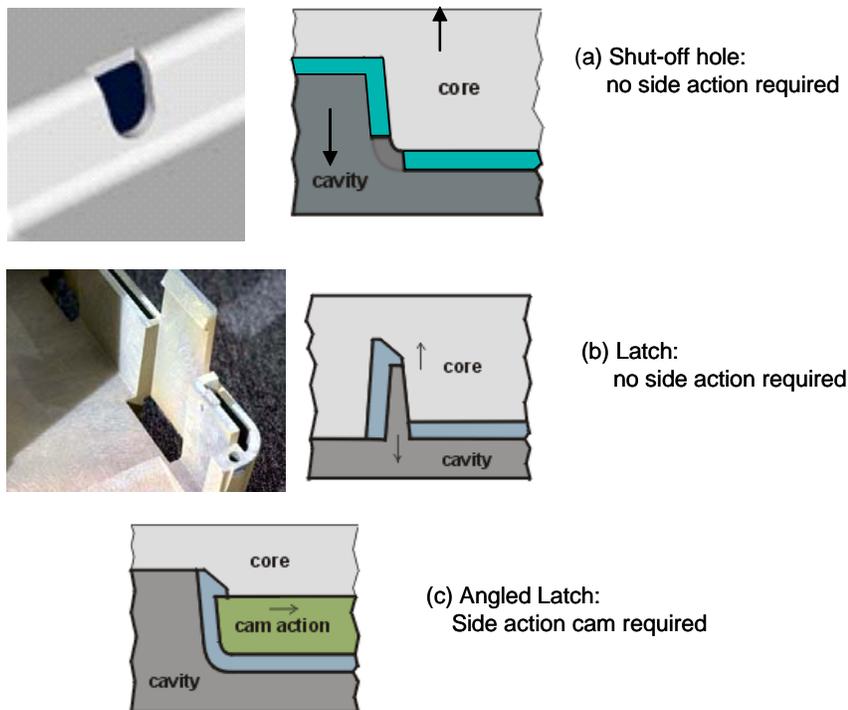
Examples of molds with complex parting lines, and a multi-part mold
